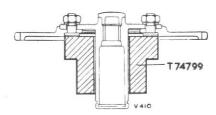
Using vice block T74799 to tighten nuts on the air compressor and tachometer drives
